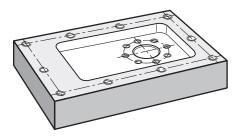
Example workpiece - programming a bolt hole pattern and a row of holes
